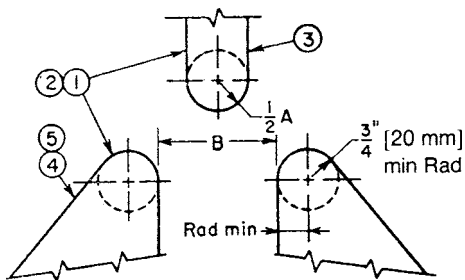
Alternative Roller-Equipped Guided-Bend Test Jig
